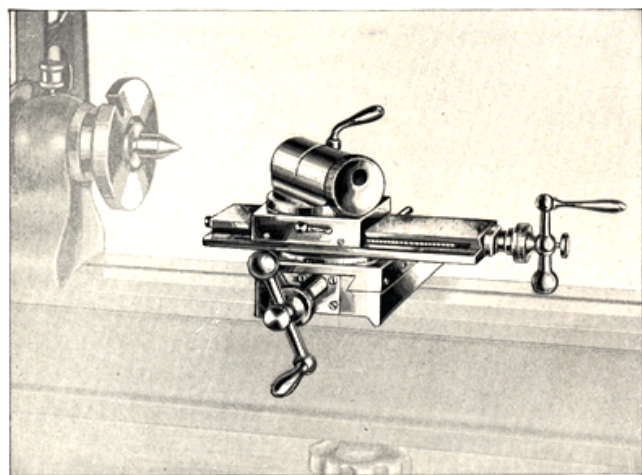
Compound Slide Rest with Eccentric Tool Holder.
